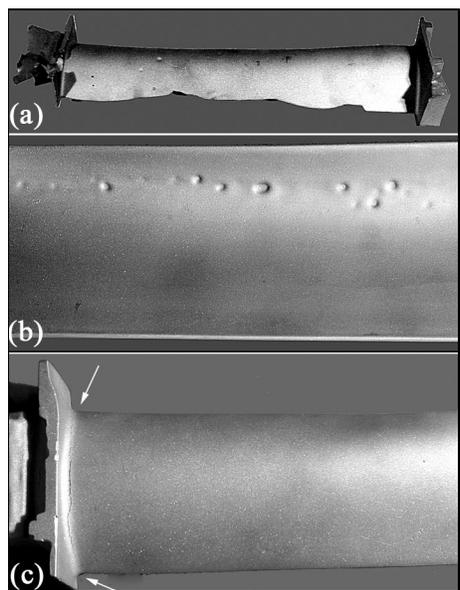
Typical defects in commercial TiAl castings: (a) misrun; (b) HIP sinks; (c) cracks.
